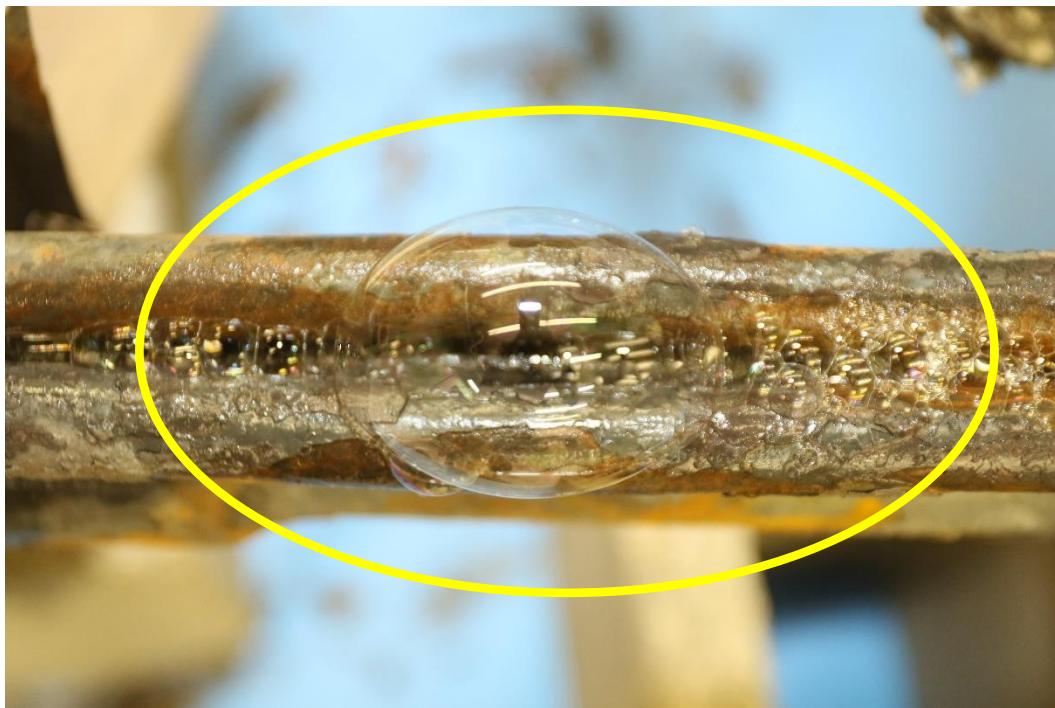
Item #1, enlarged photograph of boiler tube with bubbles at location of leak.
